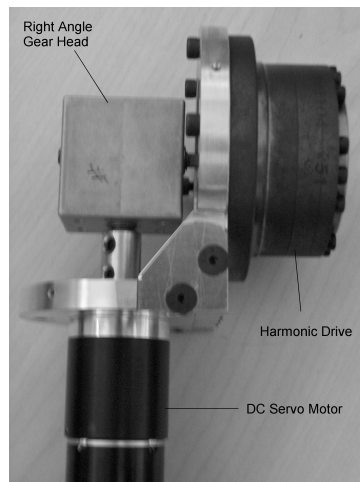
Joint 4 with Right Angle Gear Head and Harmonic Drive
